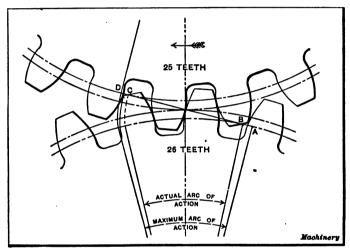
Tooth Action of Standard Involute Tooth Gears
